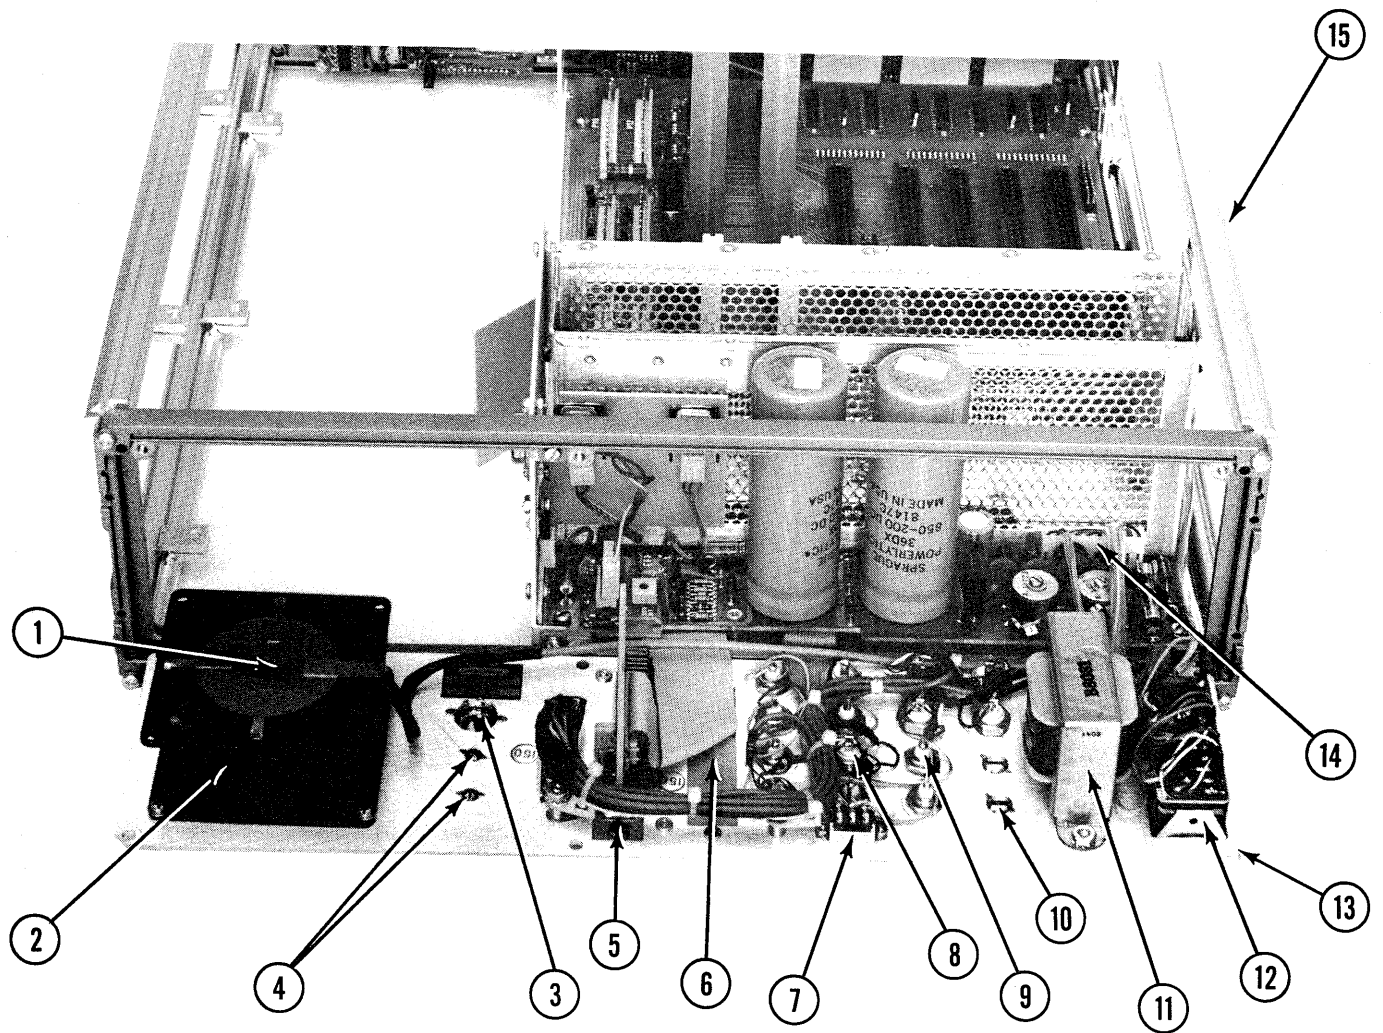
A16 Rear Panel Assembly (Sheet 2 of 2)
